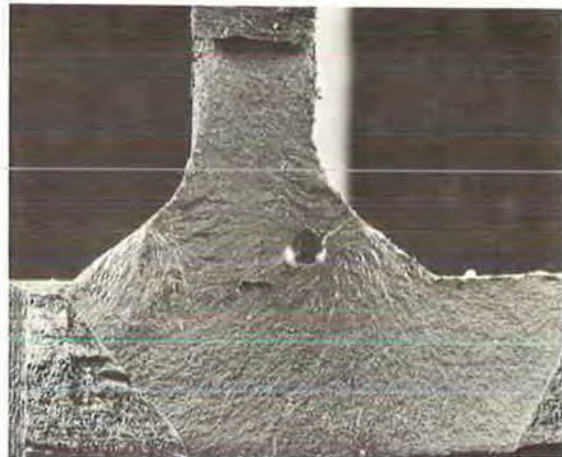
Crack initiation from gas porosity in web-flange fillet welds.
